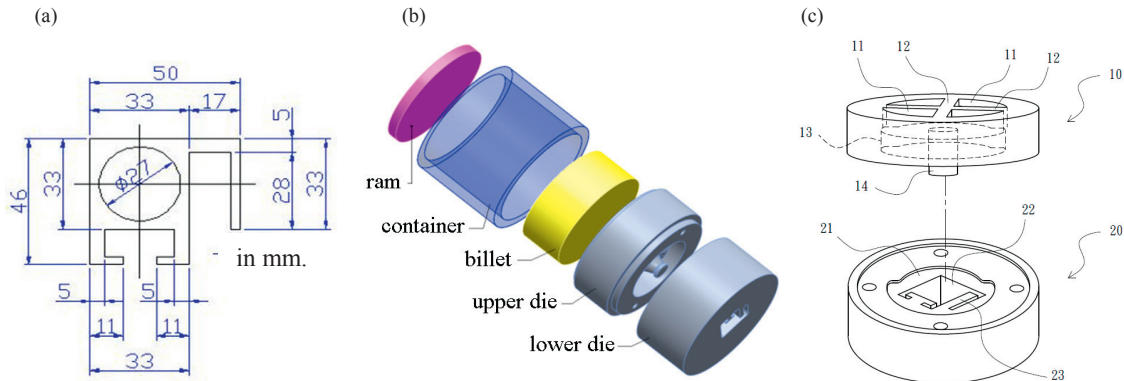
(a) Hollow extruded product with complex profile; (b) die configuration for porthole extrusion; (c) upper die and lower die.
